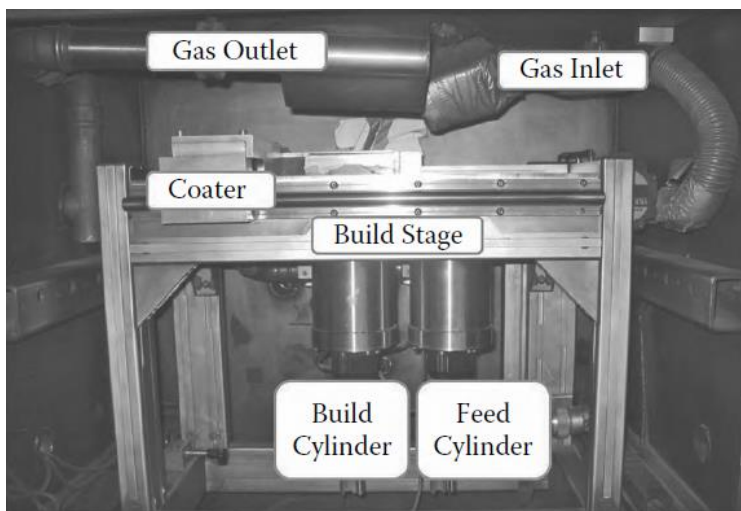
An example of a SLM machine build chamber at KU Leuven.
